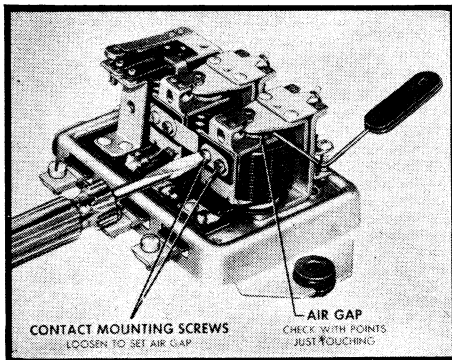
Checking and adjusting Delco-Remy single contact voltage regulator armature air gap. Check and adjust current regulator in the same manner
